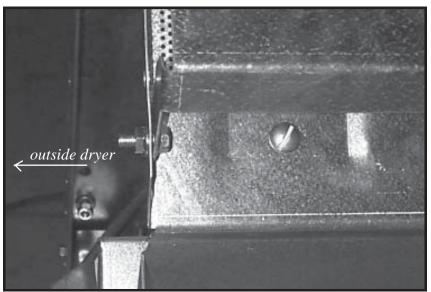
Loosely bolting plenum closure door outside hinge in place. Note bolt is installed toward outside of dryer.
